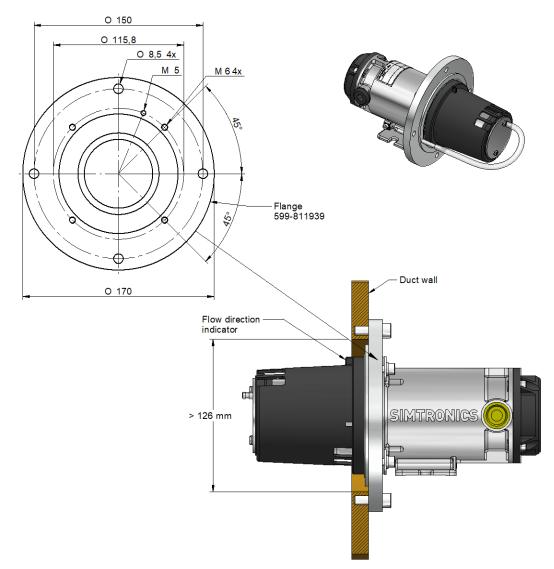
Ventilation duct or pipe mounting using Duct Mounting Flange Kit (Refer to Figure 3 for details)
